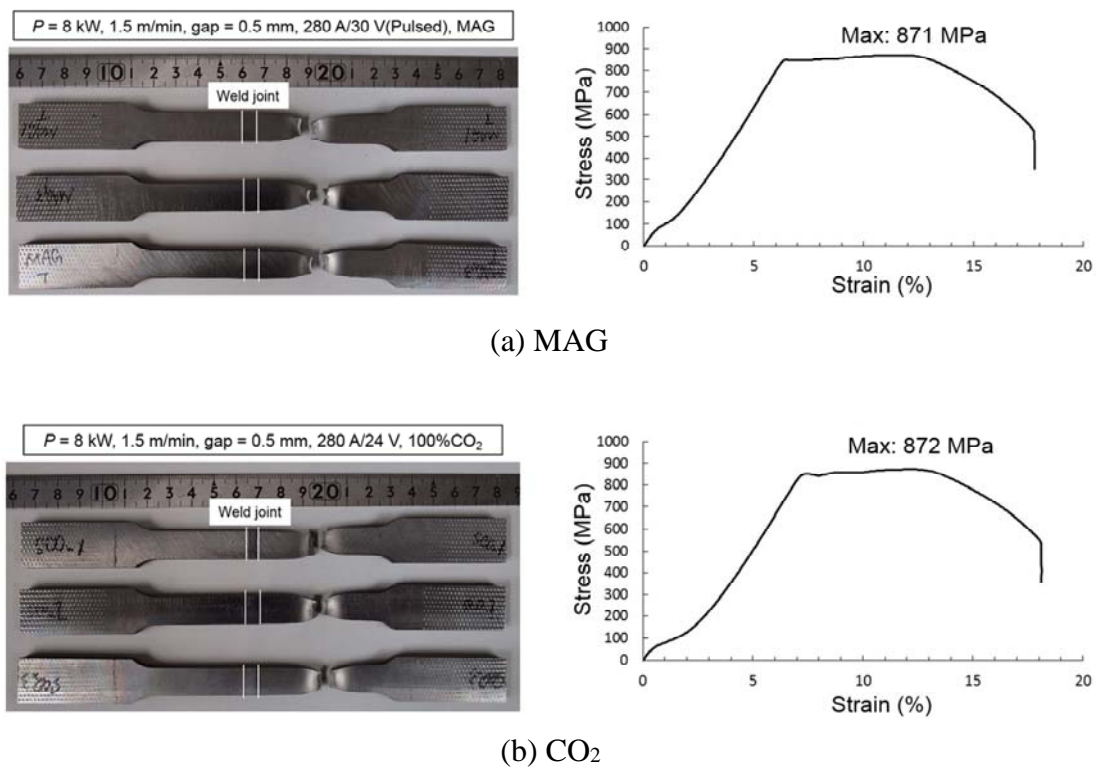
Tensile test results of hybrid weld joints produced in MAG (a) and CO₂ gas (b).
